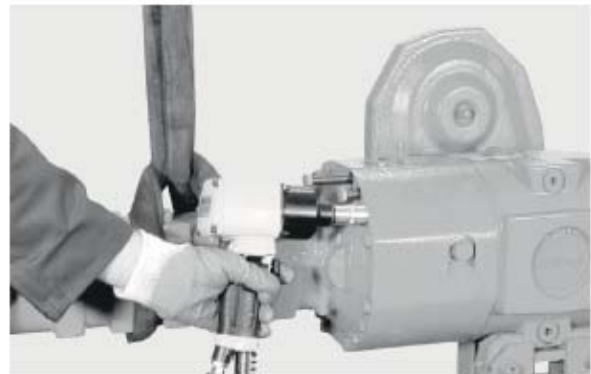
Sling the arm to be removed and connect it to a hoist. Remove screws.
